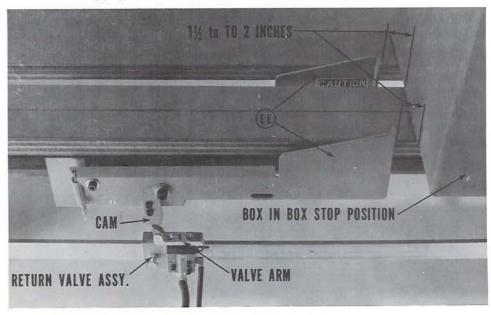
CARRIAGE RETURN VALVE (One Platform Bed Removed - Right Side View)
